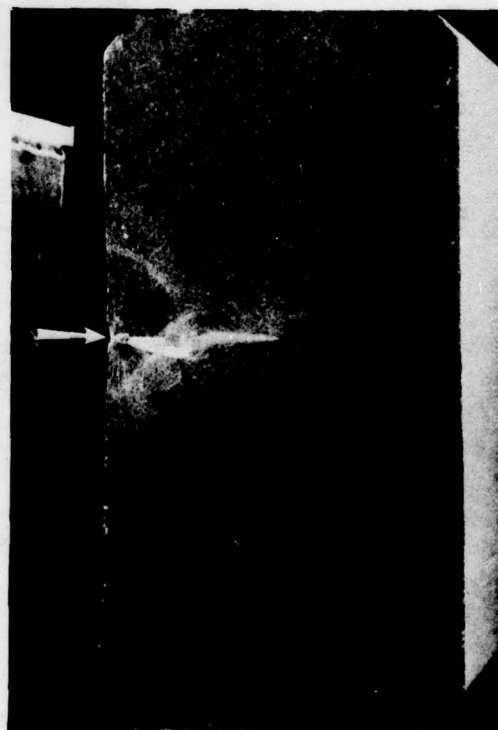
Fracture Surfaces of NC-132 HPSN Specimen No. 2, Showing Fracture Origin.
